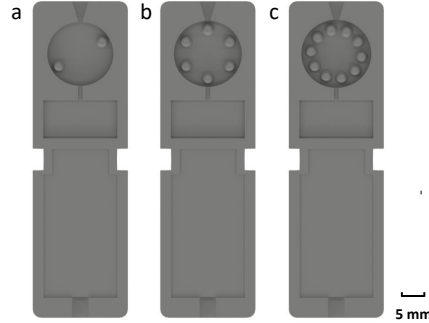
The three mould designs used in this study. a) 2 Pin b) 6 Pin c) 10 Pin.
